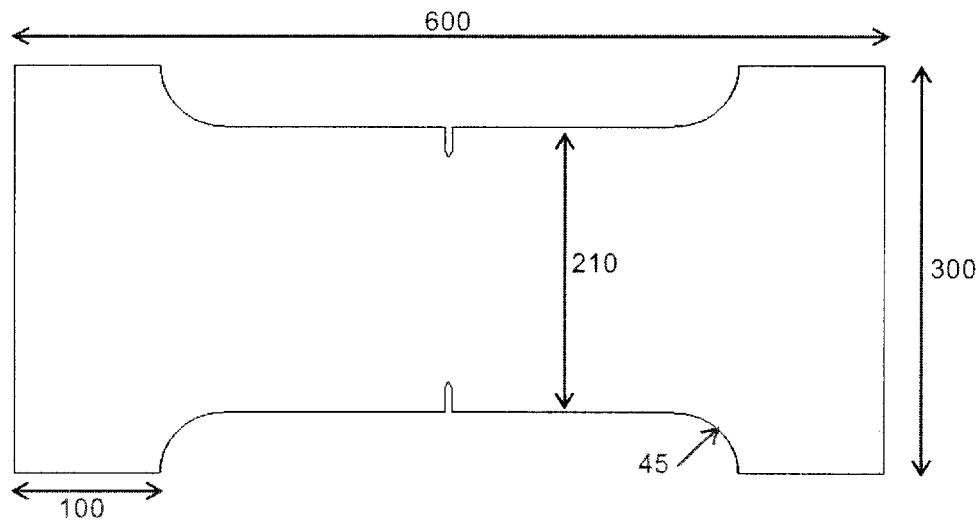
Double Edge Notched Tension (DENT) specimen geometry subjected to quasi-static uniaxial tensile loading (dimensions in mm)
